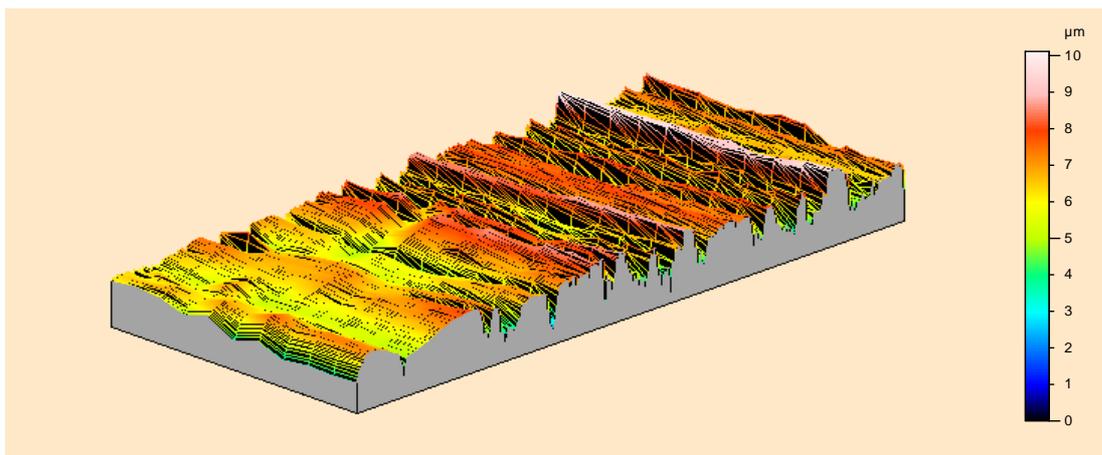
Bend-cleared dimensional figure of surface of sample 1-20B after pressing
